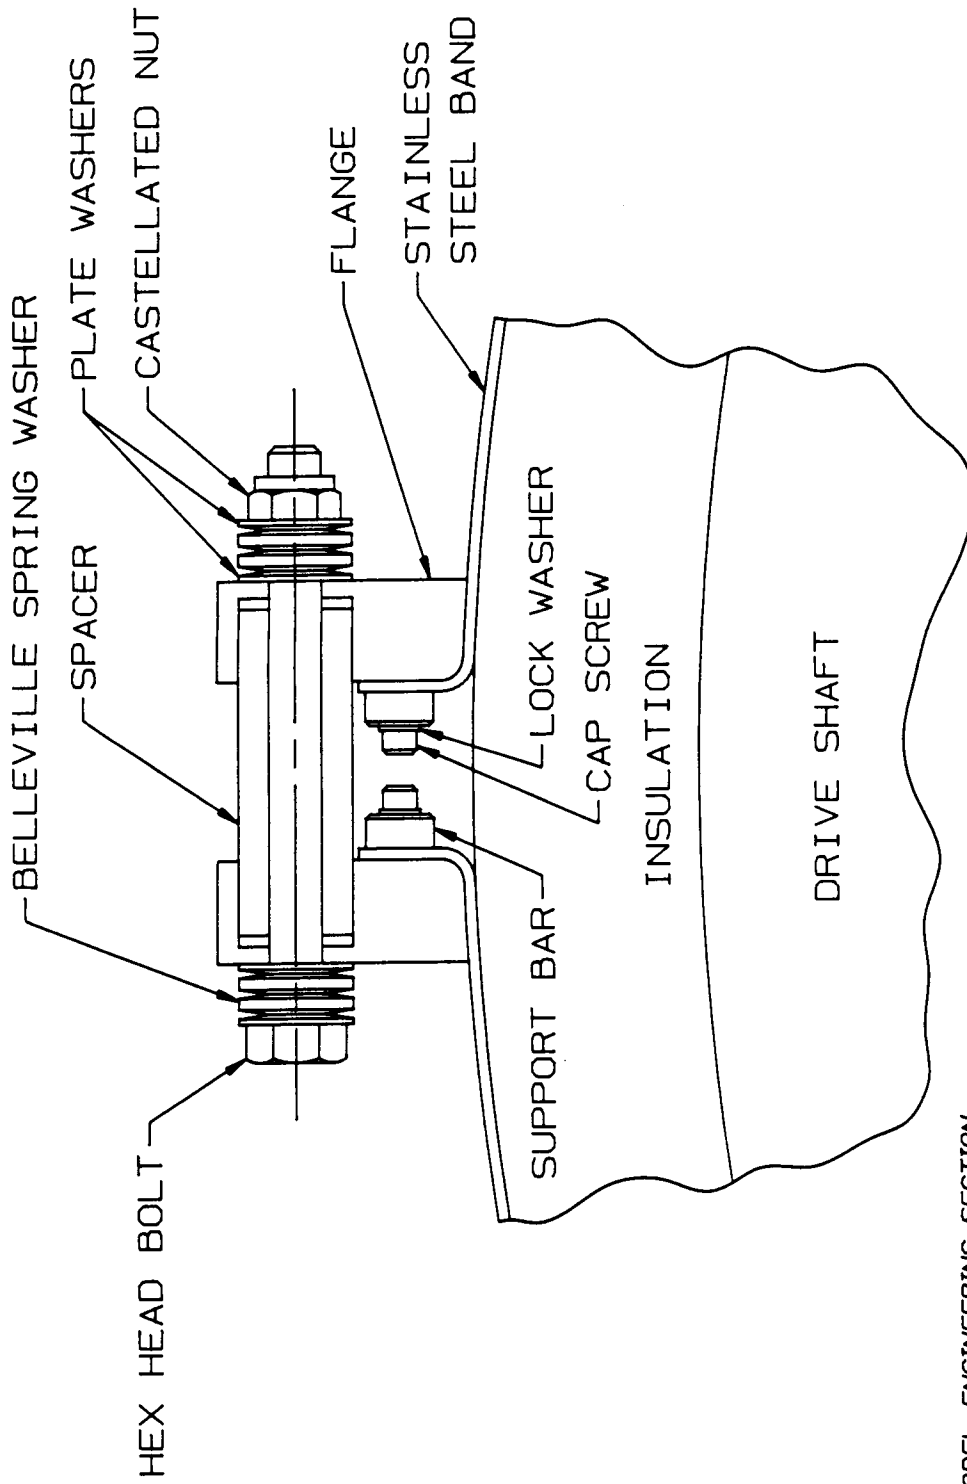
"Long" and "short" block components of the insulation retainer assembly.
